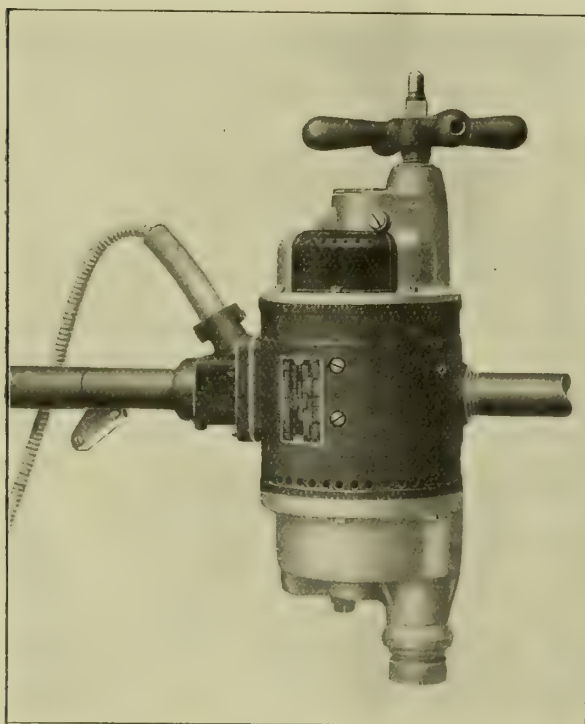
A HEAVY DUTY ELECTRIC DRILL WITH A FEED-SCREW ATTACHMENT (The Consolidated Pneumatic Tool Company.)
